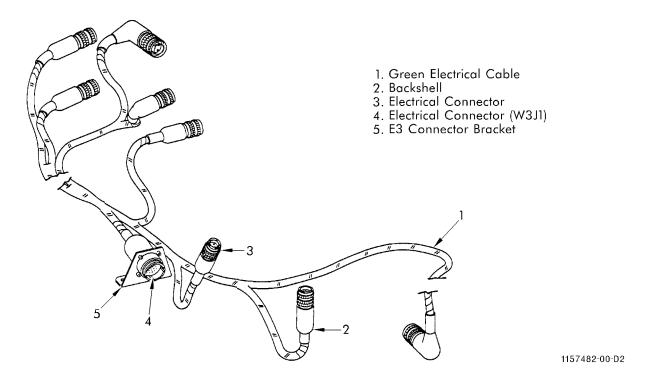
(T700, T701C, T701D) Green Electrical Cable; Inspection
